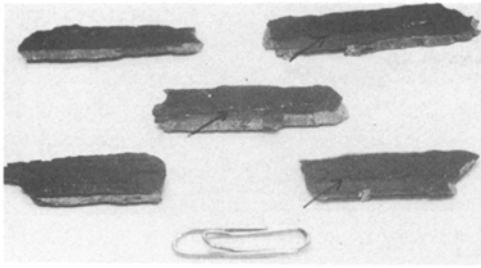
Longitudinal weld fragments of the propulsion cylinder – the step between the parent metal and weld at the inner surface.
